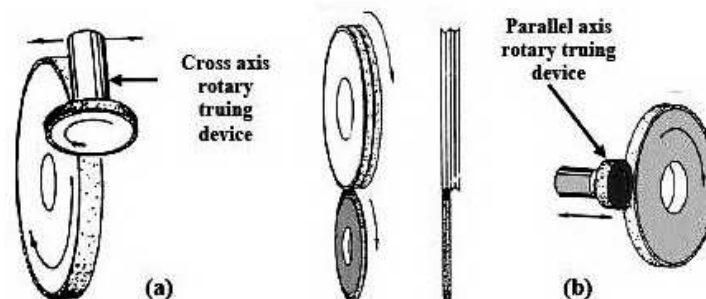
Rotary power truing wheel being used in (a) cross-axis (b) parallel-axis
